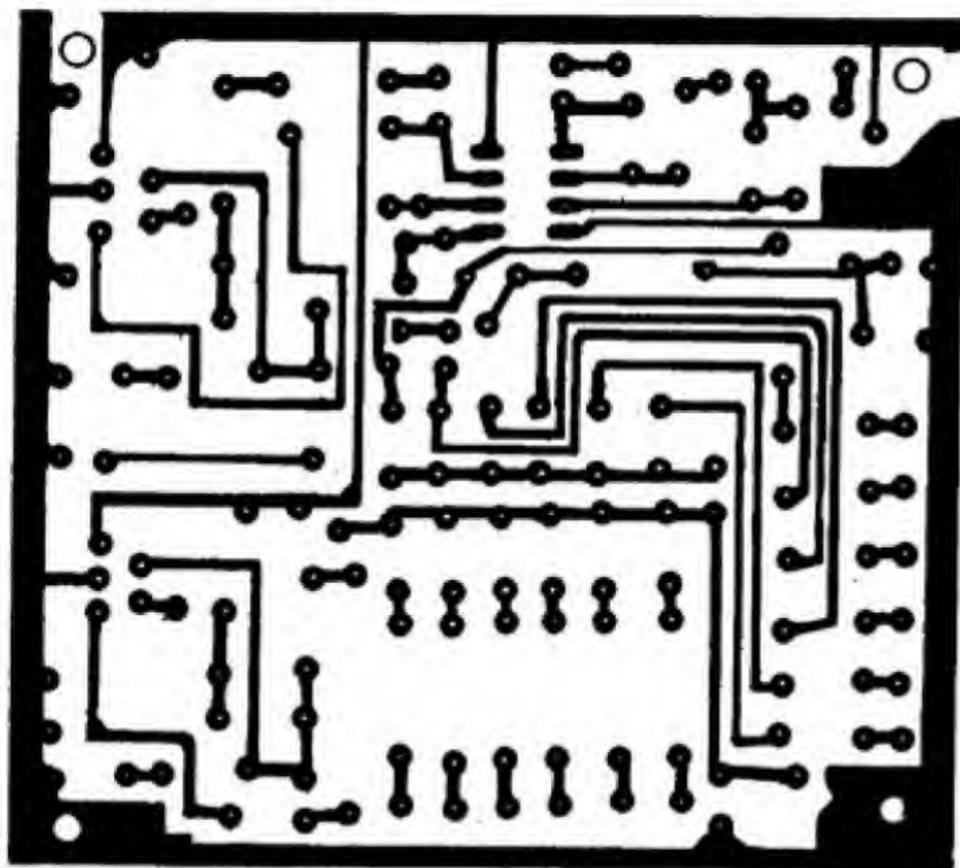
Actual-size PCB layout for the circuit shown in Fig. 2.
